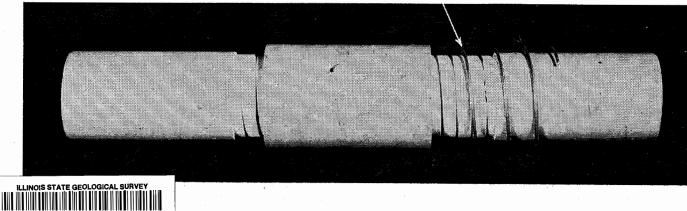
Asbestos-cement pipe and coupling assembly, and spiral metal thread is shown on outside of one section of pipe to illustrate the kind of thread in the coupling, which is invisible in the picture.
